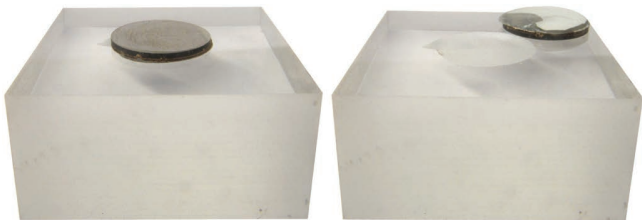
Specimen after brazing process, specimen without chamfer (left), fracture of the ceramic due to the high notch stress (right).
